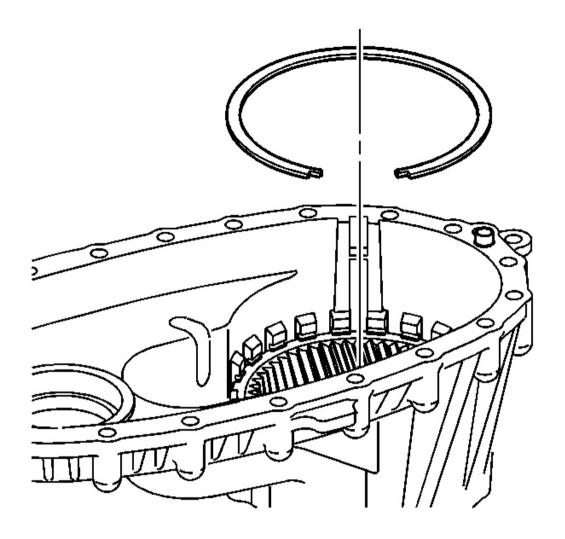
Retaining Ring & Annulus Gear Courtesy of GENERAL MOTORS CORP.
